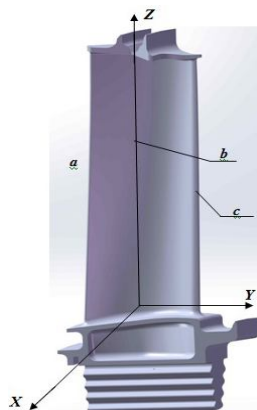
Three-dimensional model of the bandaged gas turbine rotor impeller section
